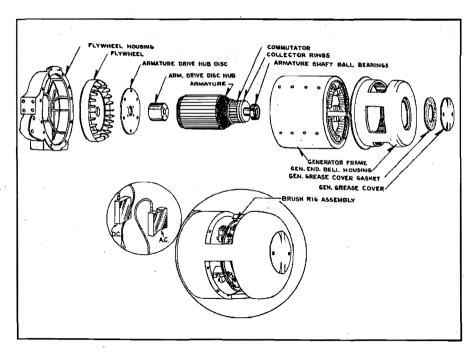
FIG. K-ALTERNATING CURRENT GENERATOR ASSEMBLY
